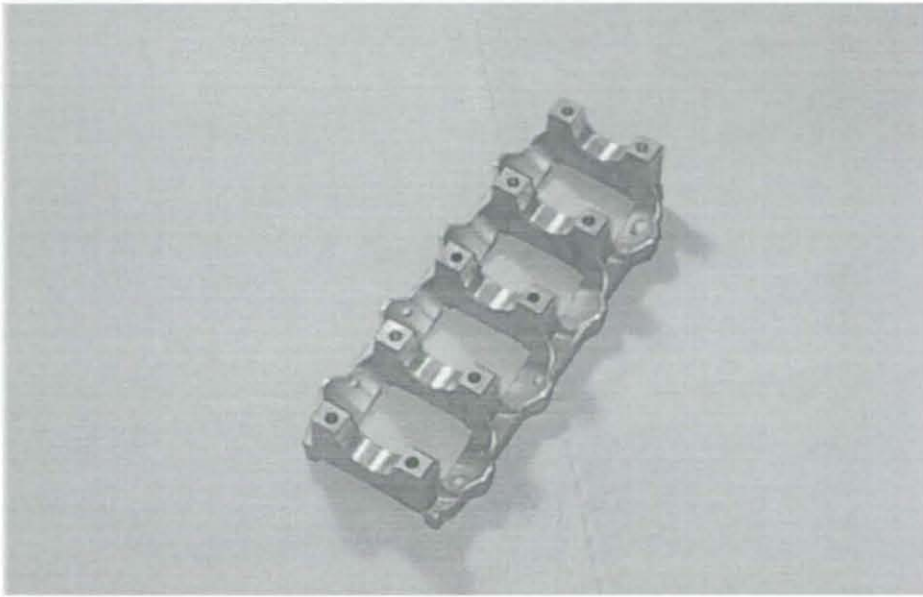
Bearing Beam (Single Piece; Cast Aluminium)
